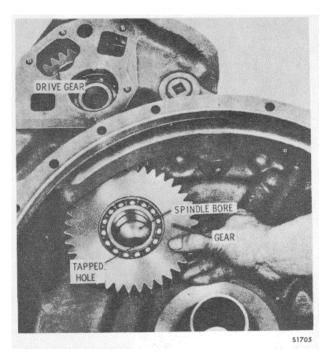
Installing Oil Pump Idler Gear Assembly
